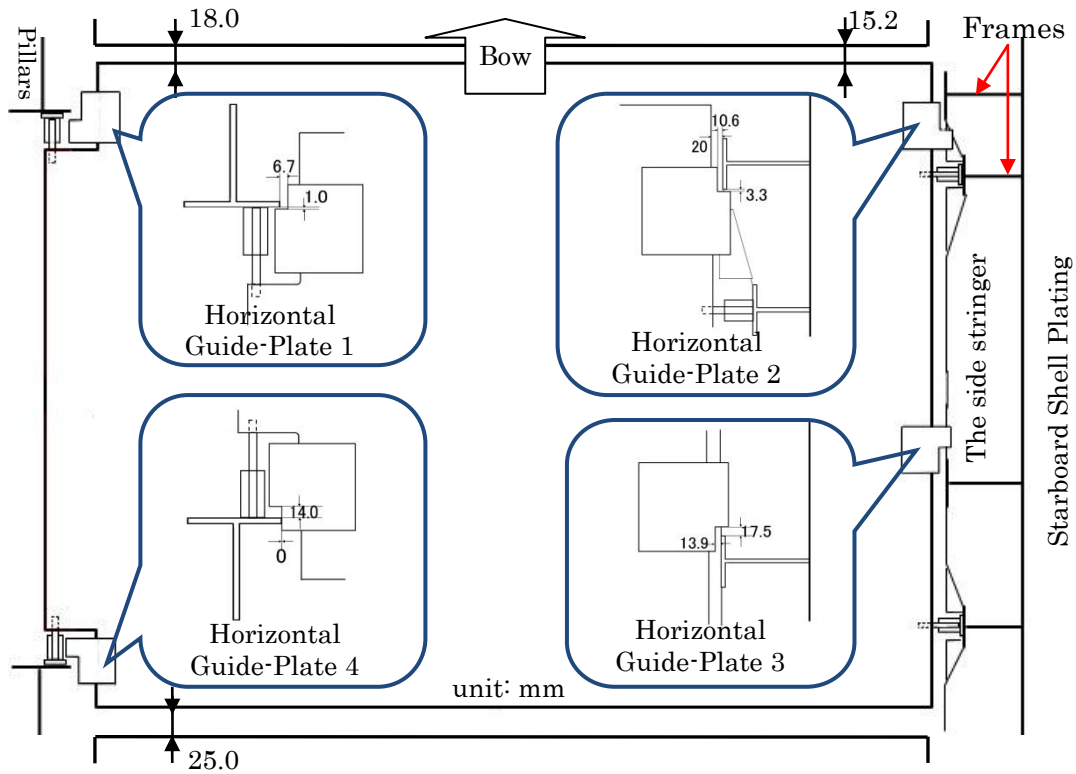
8: Gaps between the Deck Panel and surrounding Structures
